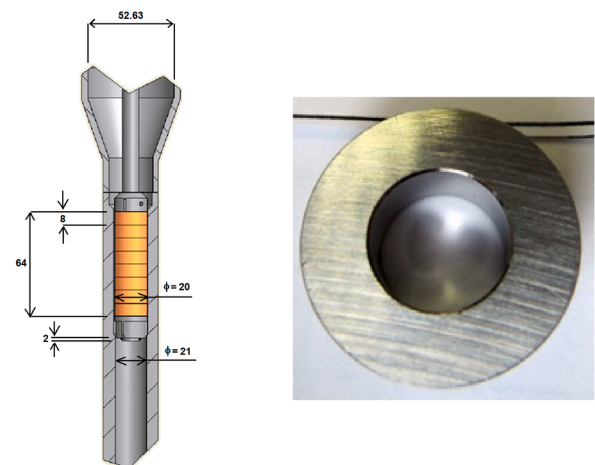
Left: sketch of Lifus 6 test section with specimens inside (highlighted in orange). Dimensions are in mm. Right: typical fresh specimen before insertion in the test section.
